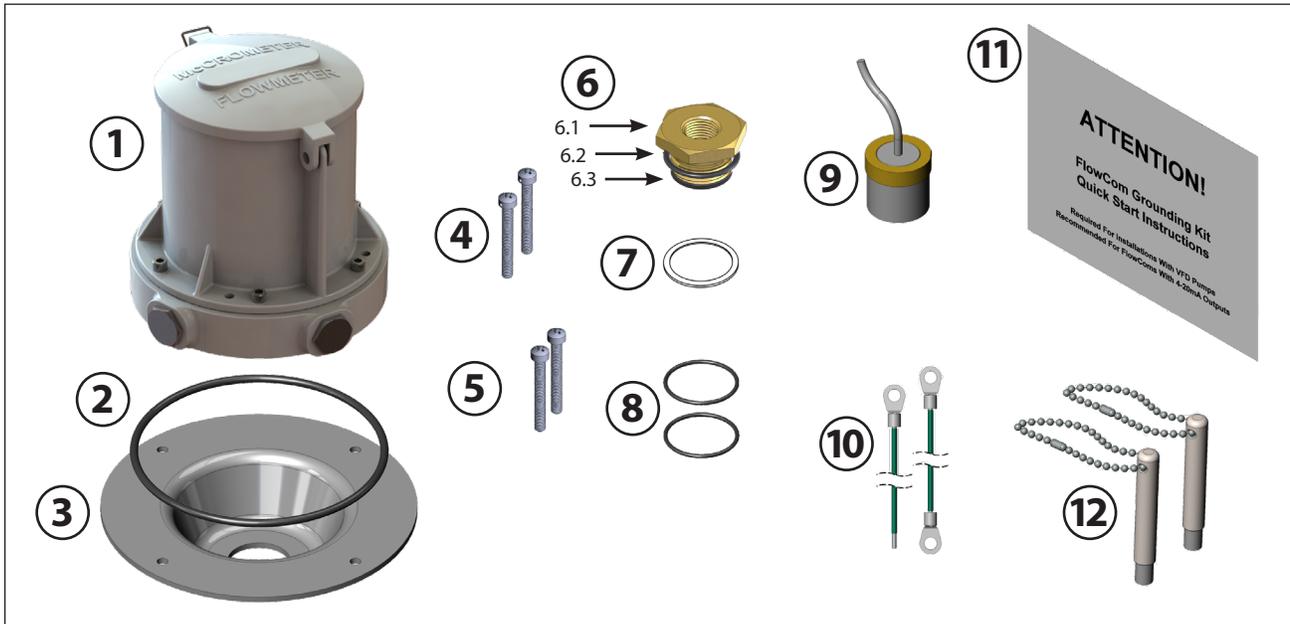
Conversion kit - FC100-01-K, FC100-02-K, FC100-03-K, meter mount
